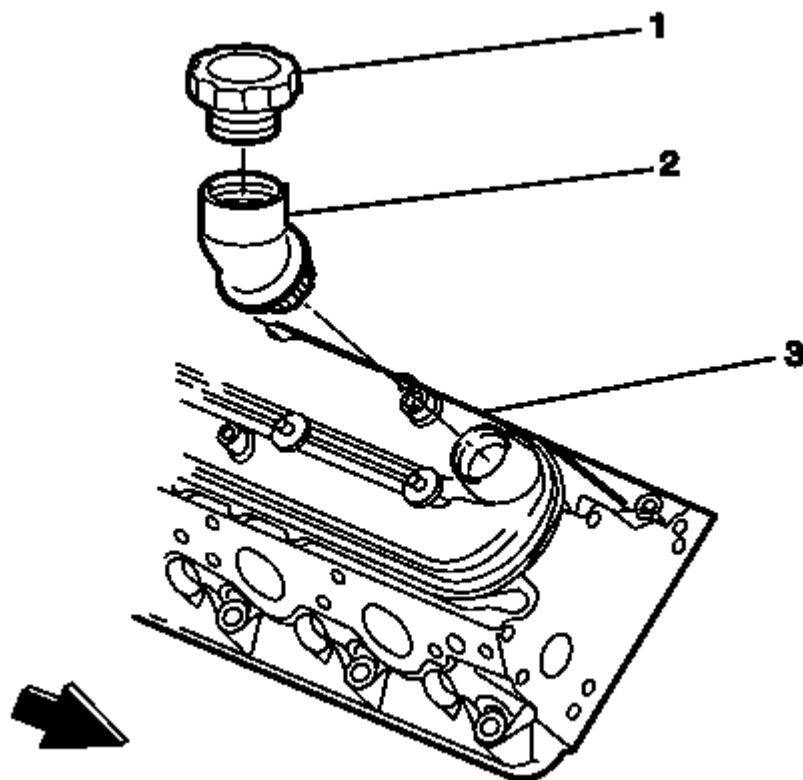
View Of Valve Rocker Arm Cover, Oil Fill Tube & Cap (Right Side)
